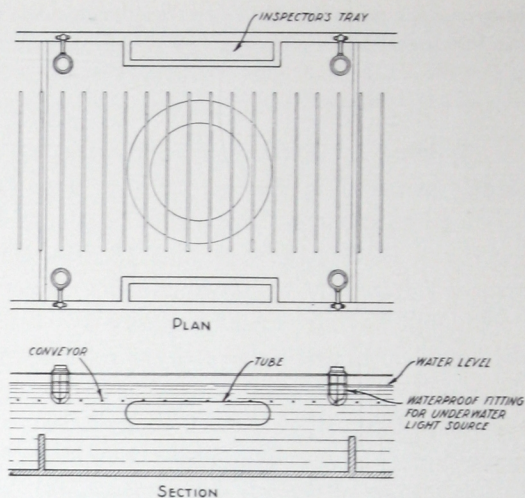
Plan of underwater lighting in the inner tube inspection tanks of a rubber tire manufacturer
